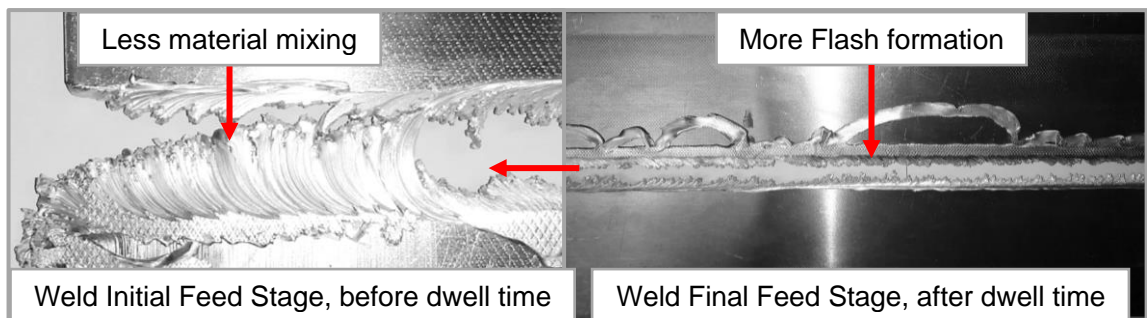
Bobbin FSW Feeder unsuccessful weld trial
